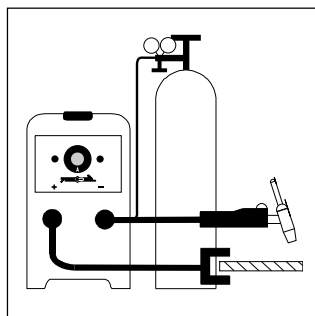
TransPocket 1400 as a TIG welding unit
